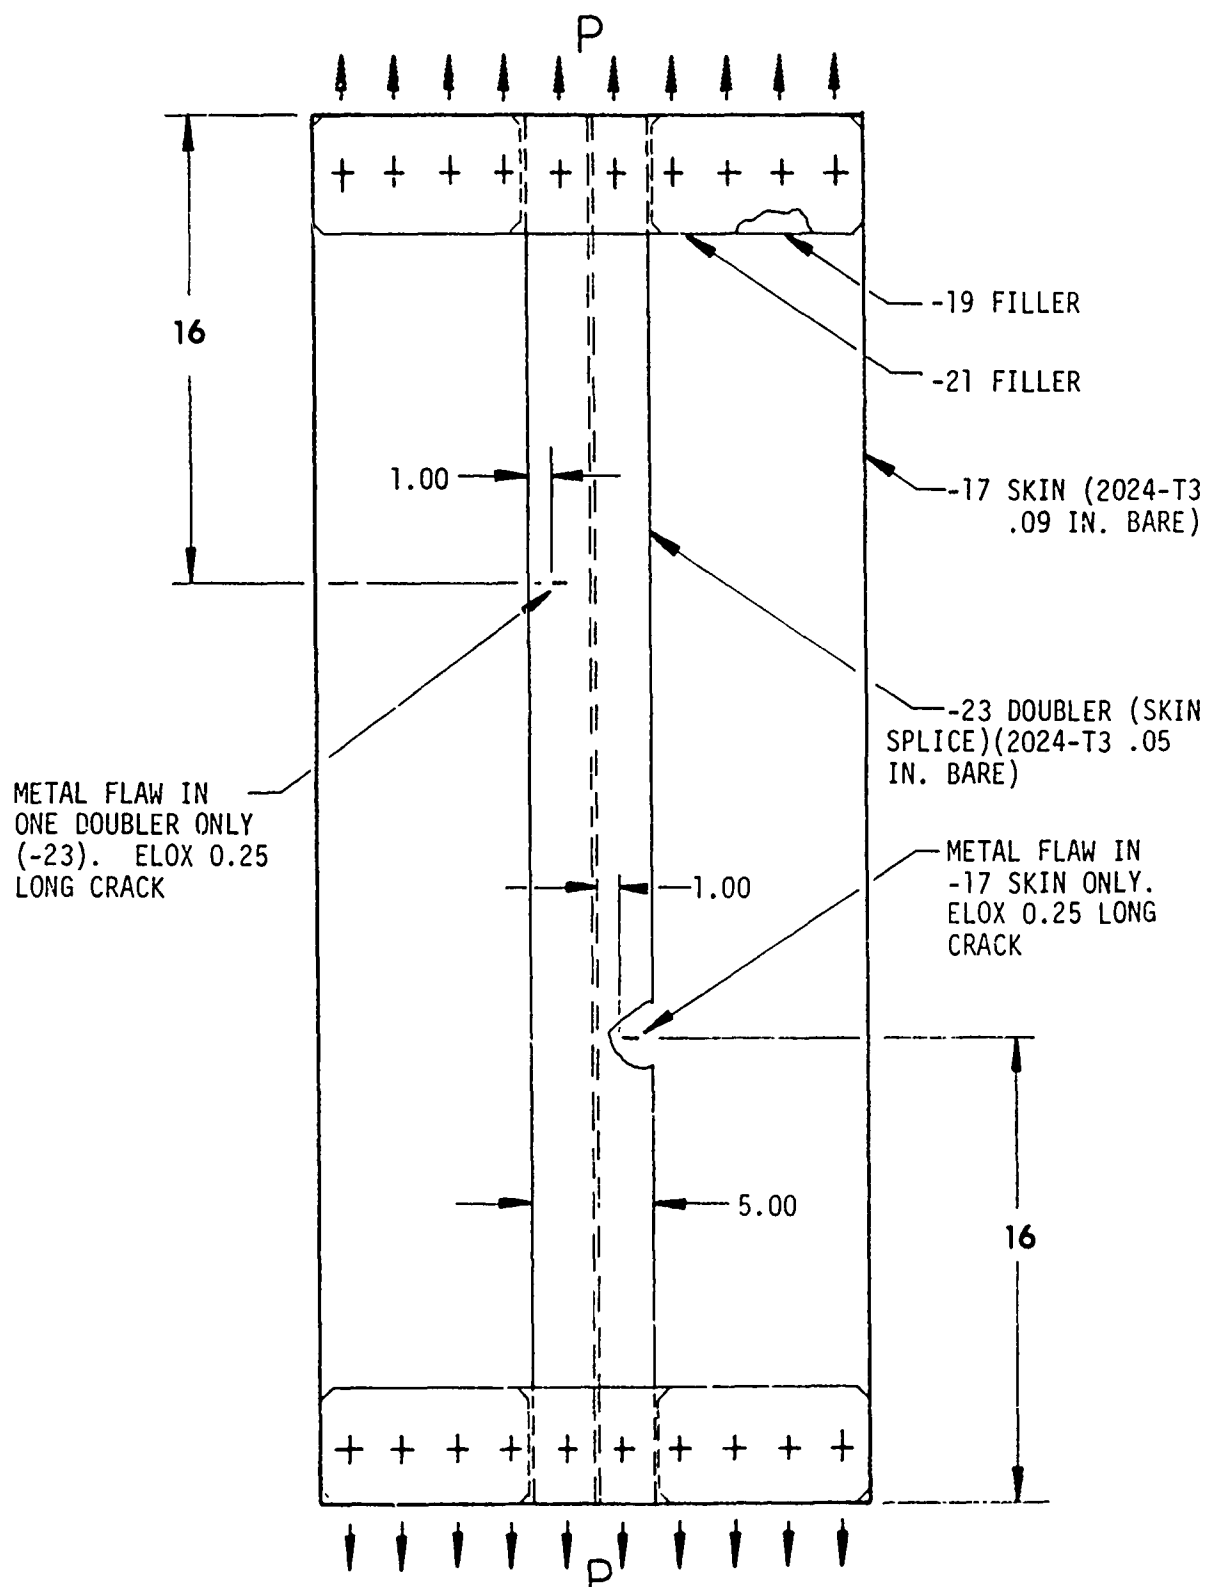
BONDED SKIN SPLICE SPECIMEN 4A WITH METAL FLAWS
